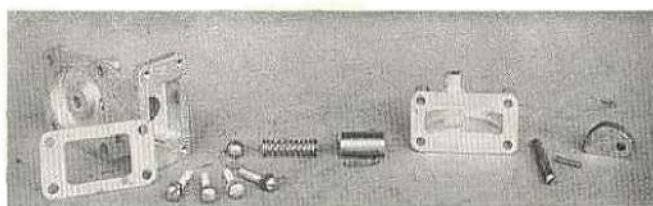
Oil Pressure Regulator. Completely disassembled and component parts in proper order of assembly.
